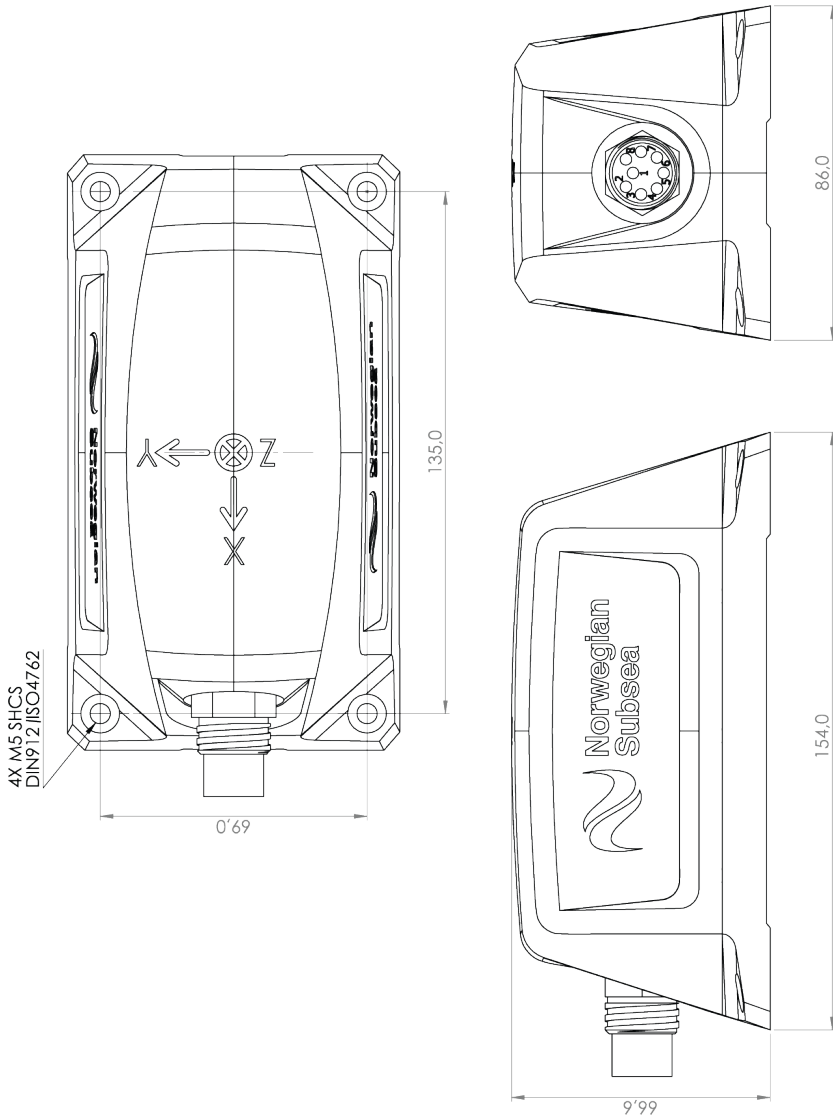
MRU Marine S / MRU Marine HS technical drawings: top, side, front views.
